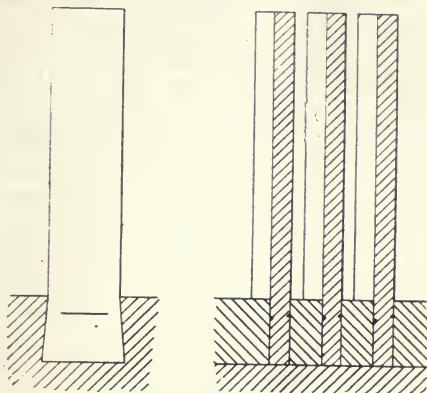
ATTACHMENT OF BLADES OF A REACTION TURBINE.
